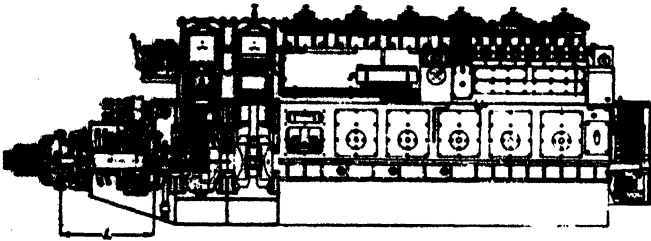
Wichmann engine, with built-in hydraulic reverse gear
